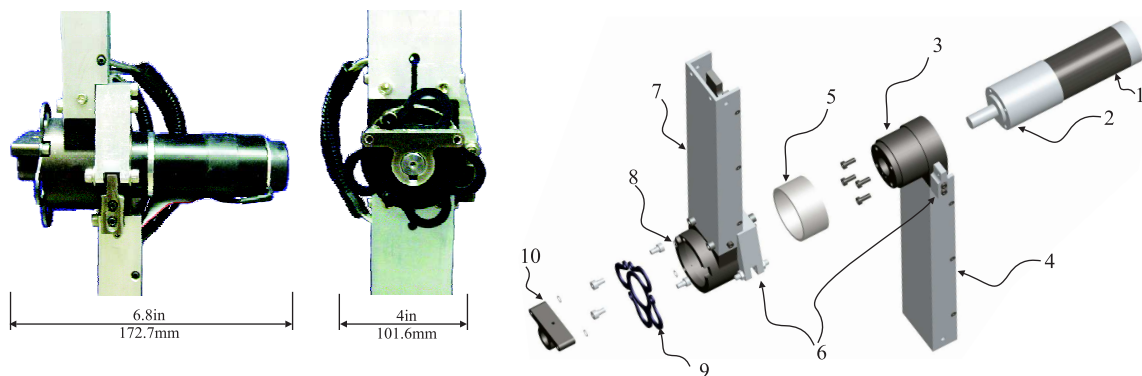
Left: Knee joint on the robot, side and frontal views. Right: CAD model - exploded view of the knee joint: 1) encoder; 2) actuation unit - motor and the gearhead; 3) inner bearing housing; 4) lower leg; 5) Teflon sleeve bearing; 6) hard stop at full knee extension; 7) upper leg; 8) external bearing housing; 9) elastic coupling; 10) connecting element.
